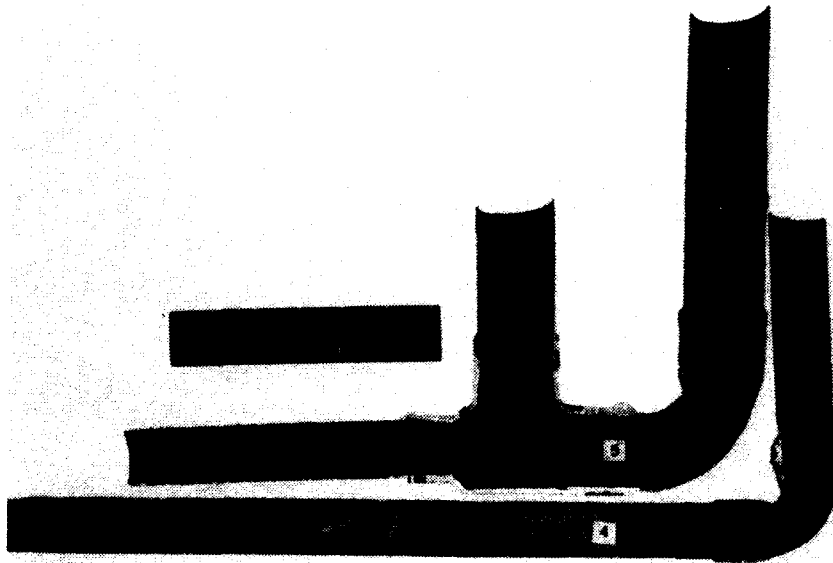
Internal Surfaces of Specimens 4 and 5 Removed Before Hot Water Flushing.
